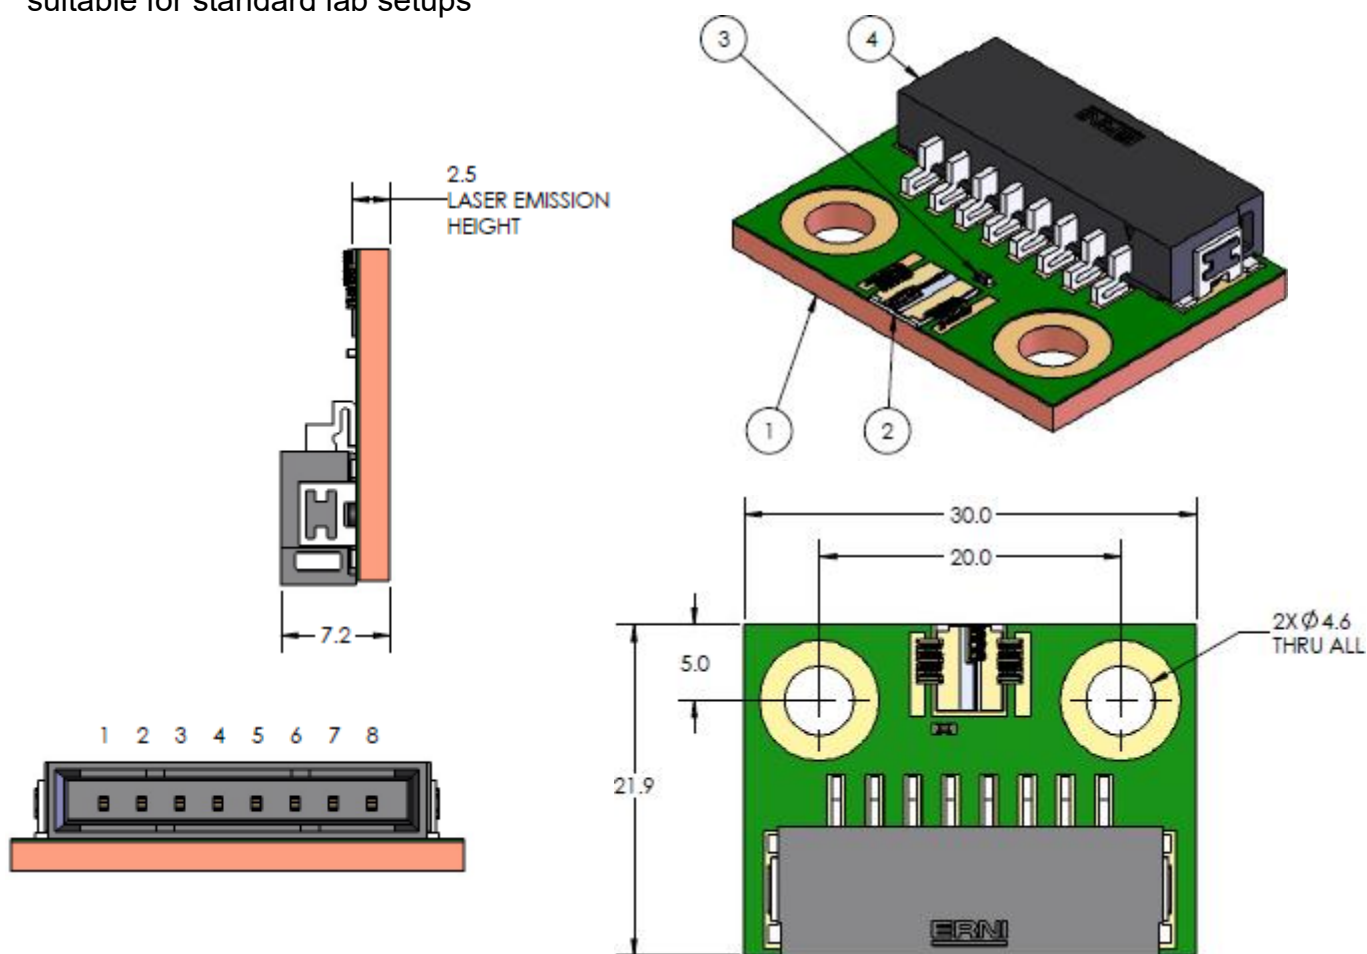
Dimensions of the Eval Board, including CoC and mounting hole placement
